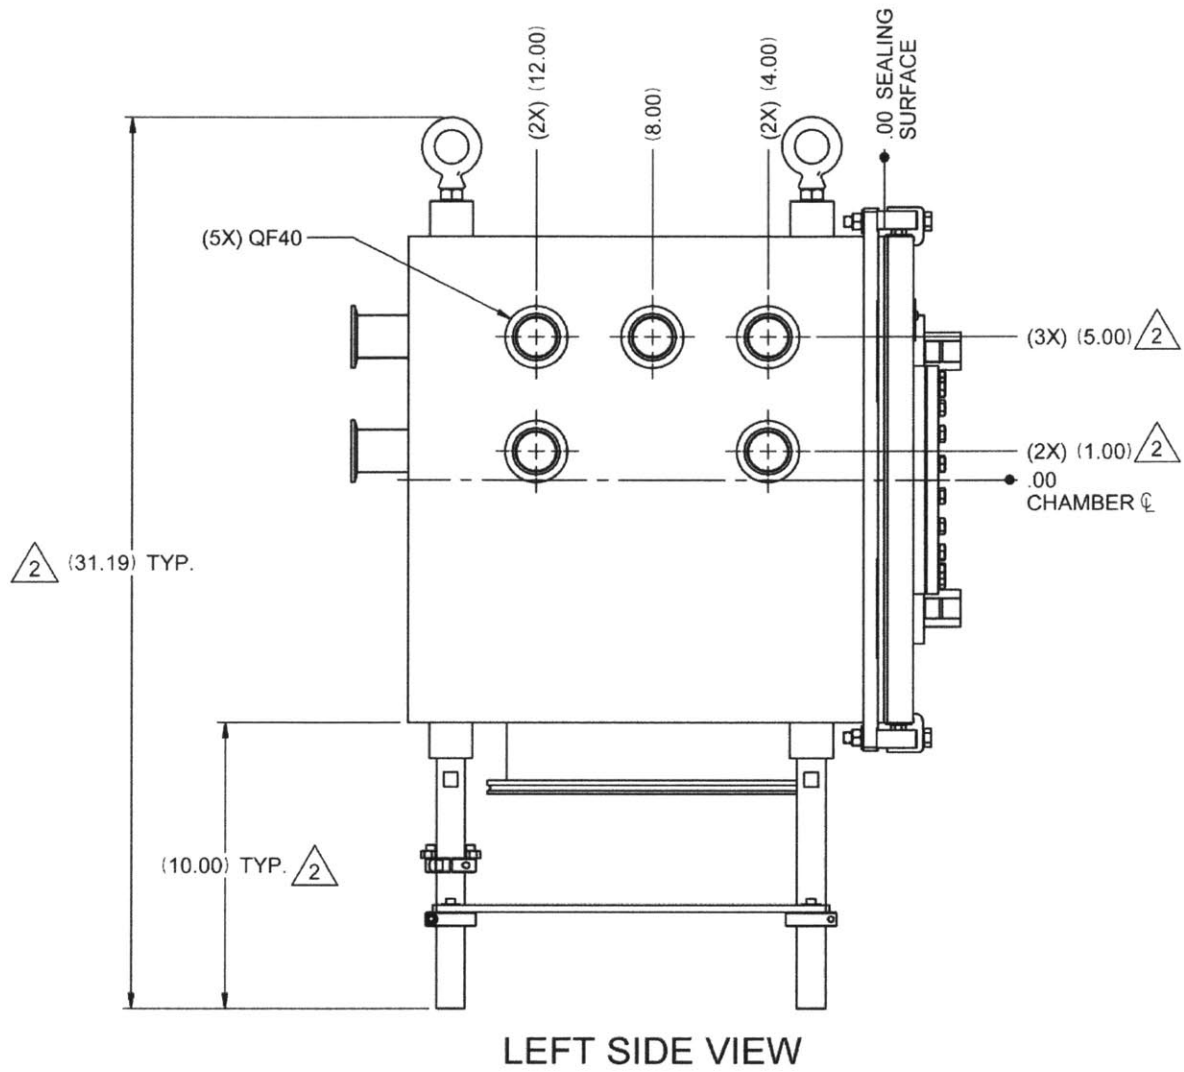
oCVD reactor chamber engineering drawing—left view. Dimensions in inches.
